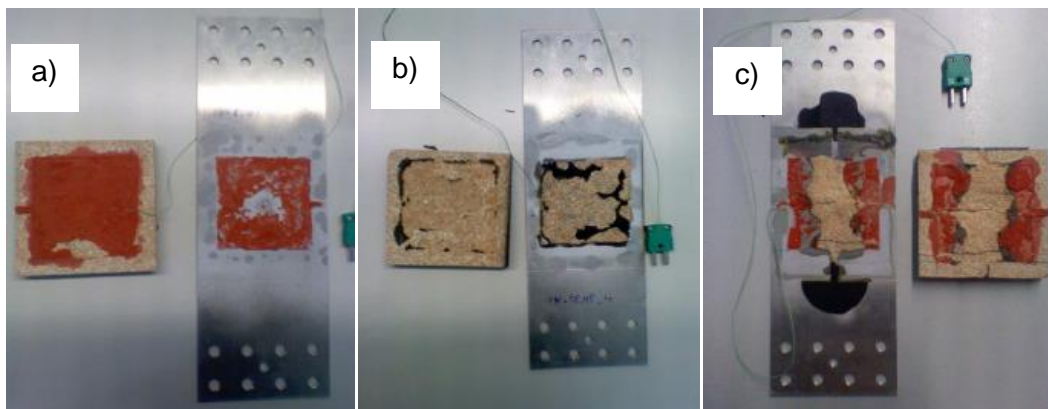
Example of cohesive fracture of specimens tested at 100°C. Legend: a) RTV106 specimen, b) XN 1244 specimen, c) Mixed adhesive joint.
